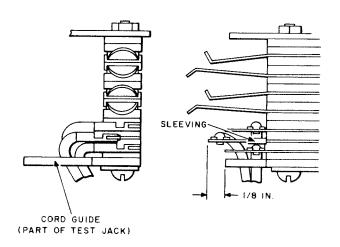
Method of Dressing and Connecting Wiper Cords at Test Jack Assembly
